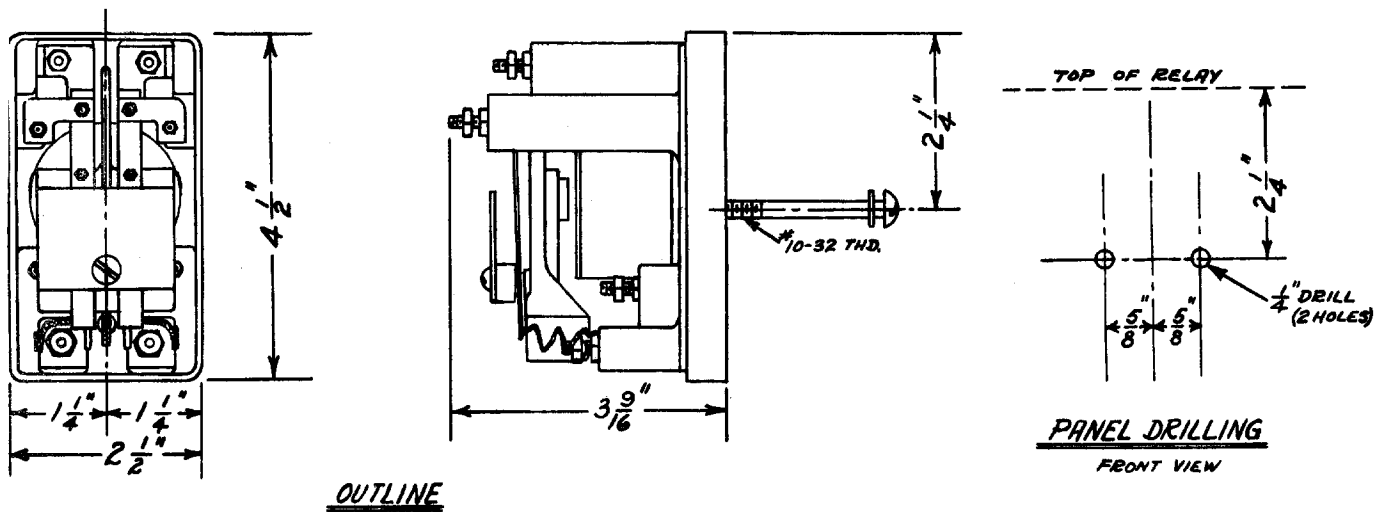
(6154350-3) Outline and Panel Drilling for Surface Mounting of HGA17B Relay.
